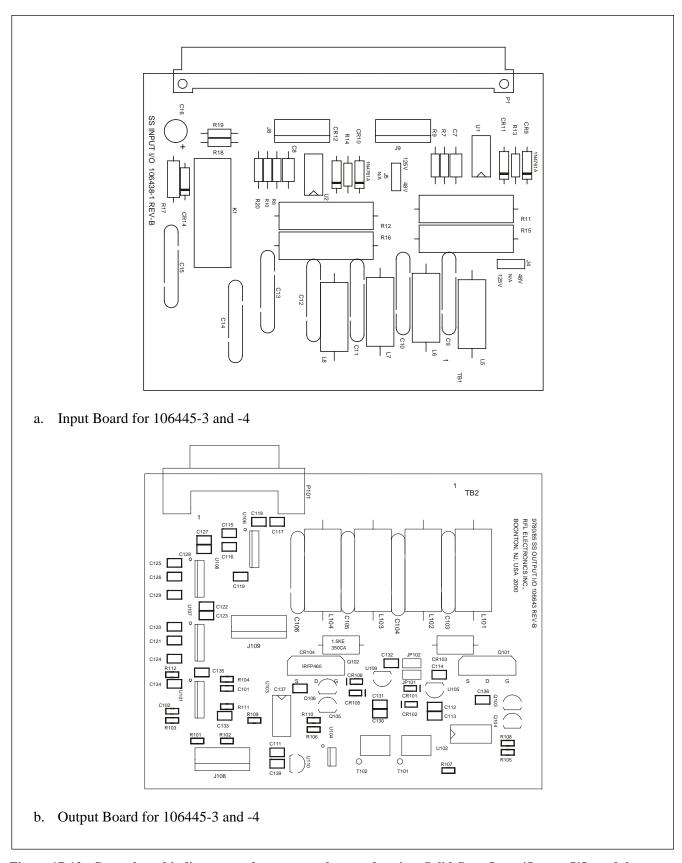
Controls and indicators, and component locator drawing, Solid-State Input/Output I/O module
